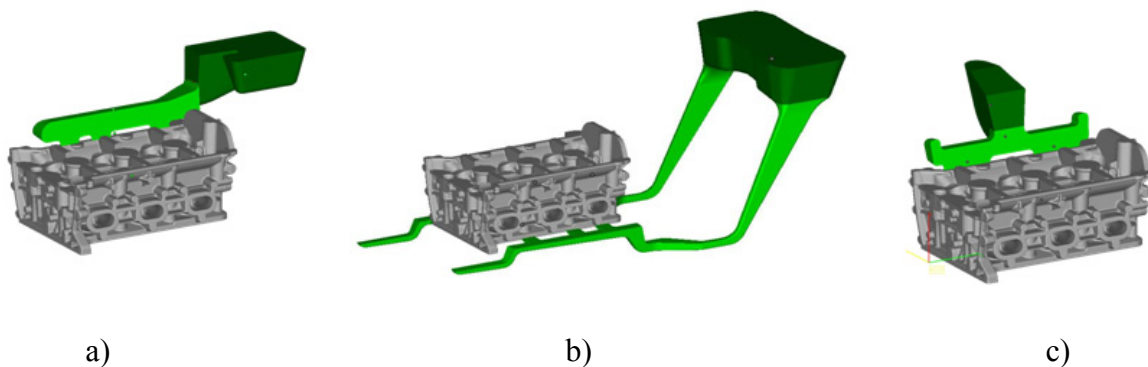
Example of cylinder heads with gating system poured by gravity a) top casting b) bottom casting and c) tilt casting [15]
